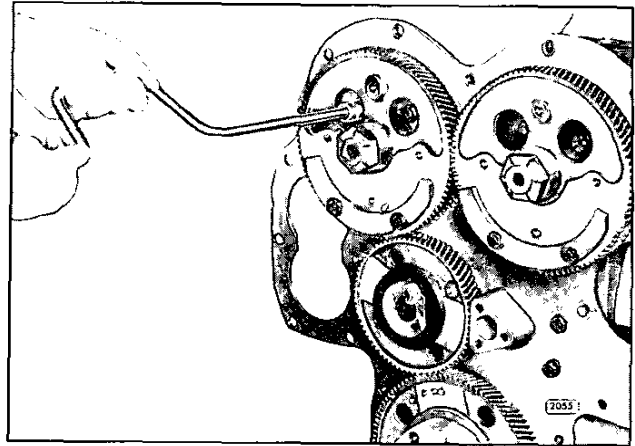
Removing or Installing Thrust Washer Retaining Bolts
